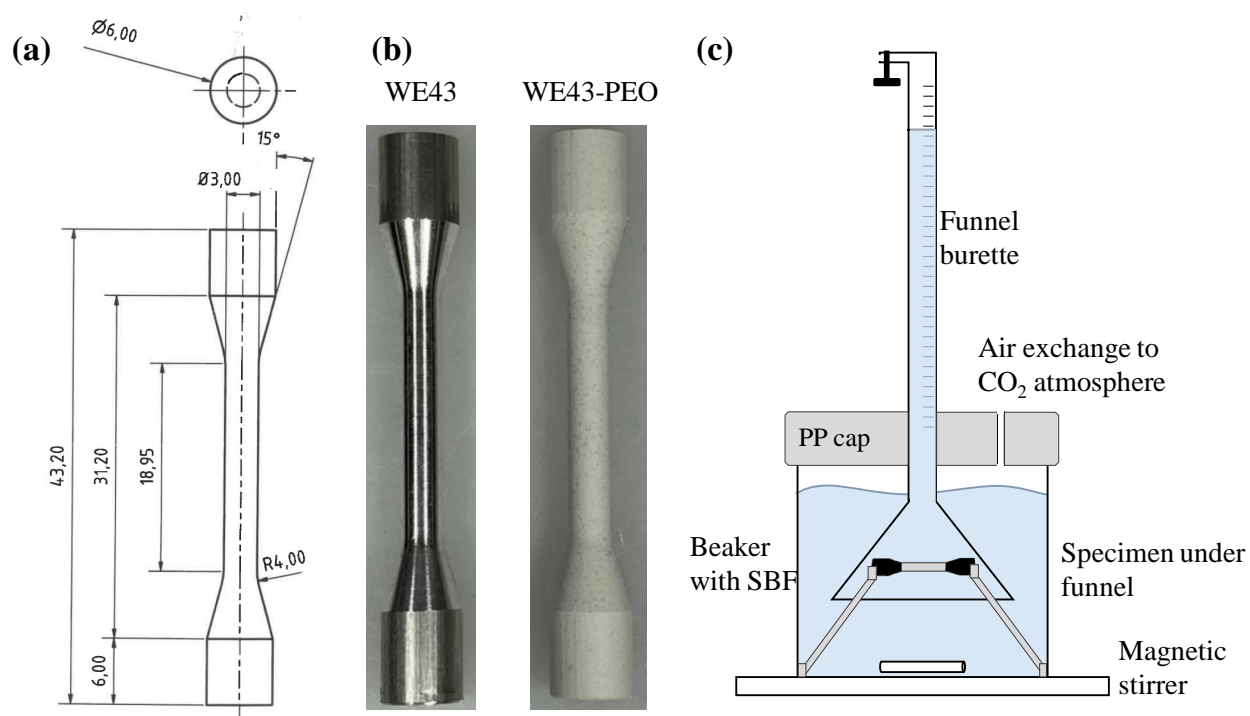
(a) Dimensions of tensile specimens; (b) images of WE43 and WE43-PEO modified samples; (c) schematic setup of immersion testing for one tensile specimen.
